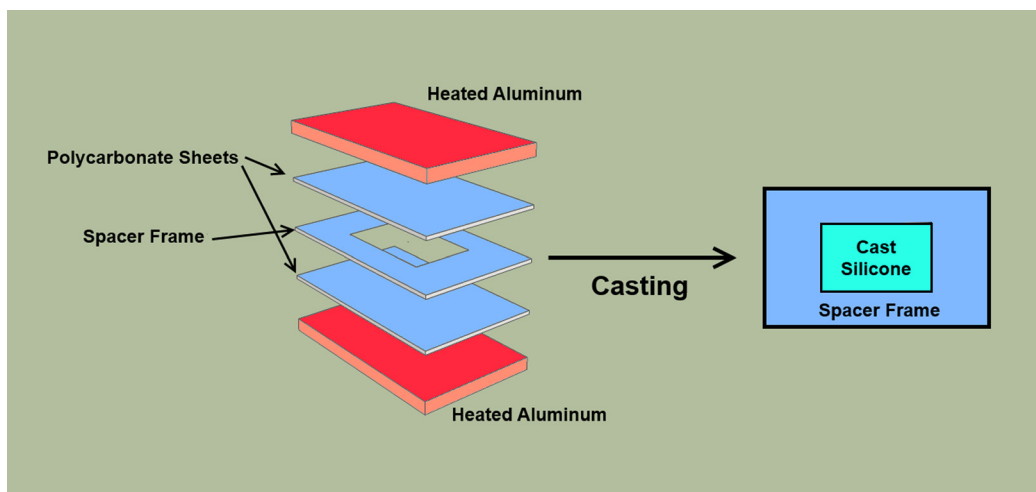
Exploded diagram of the configuration used to cast flat, featureless membranes.
